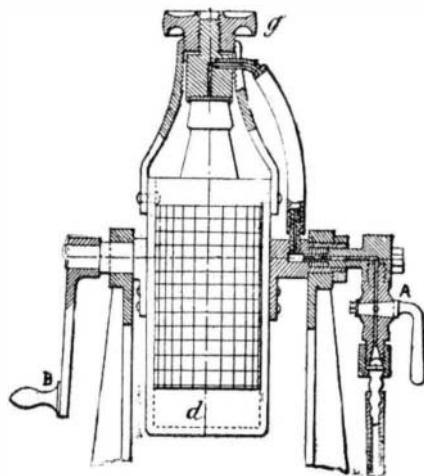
CHARGING APPARATUS FOR ONE BOTTLE.
